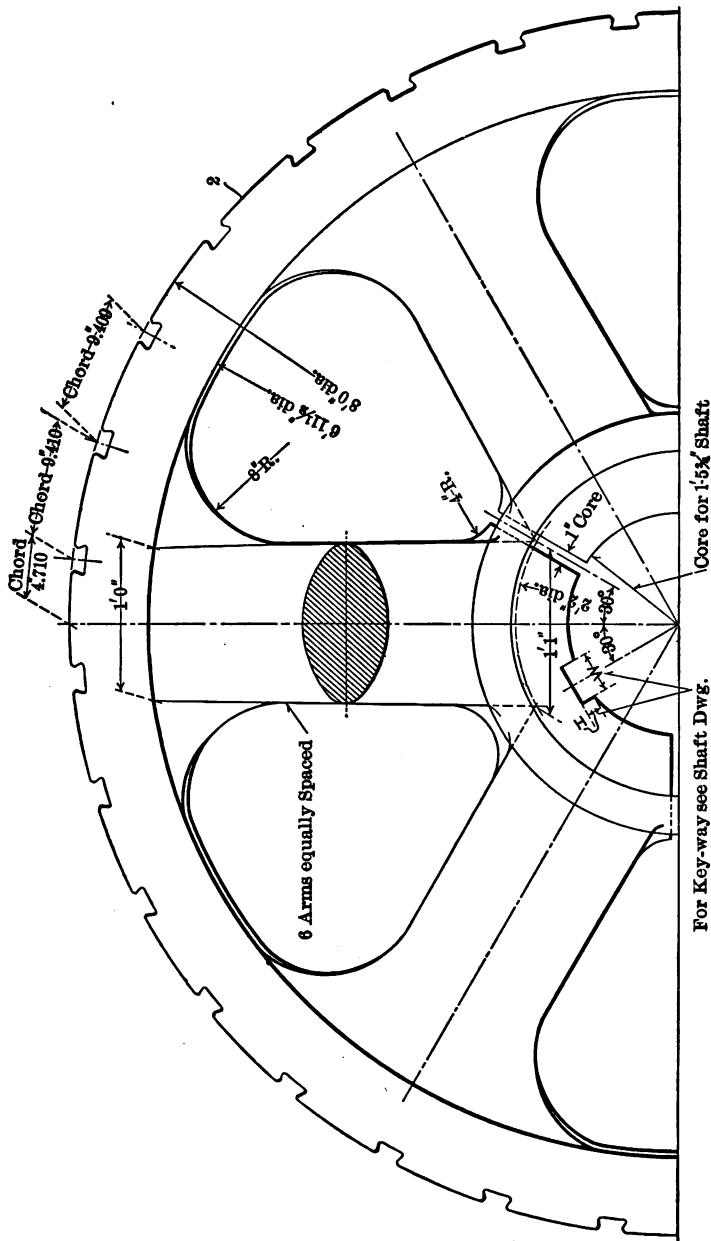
Pole-wheel of a Large Generator (Westinghouse).
